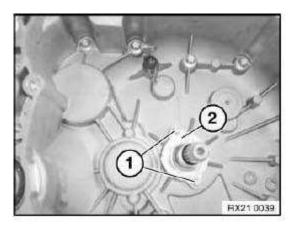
Bolts And Guide Tube Courtesy of BMW OF NORTH AMERICA, INC.
